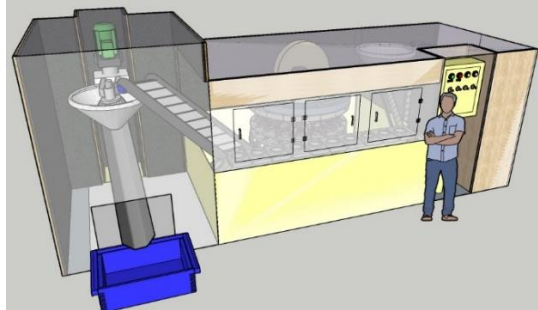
Welding threading machine damper using rockwool and polyurethane foam
